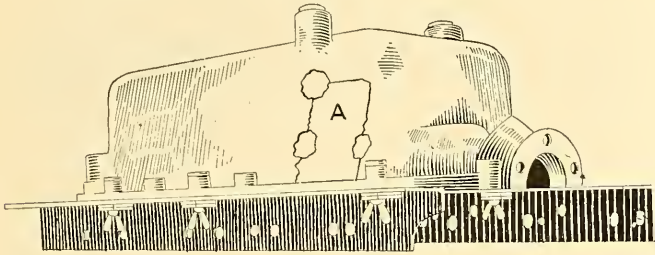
Aluminum Crankcase Stiffened by Angle Iron.
